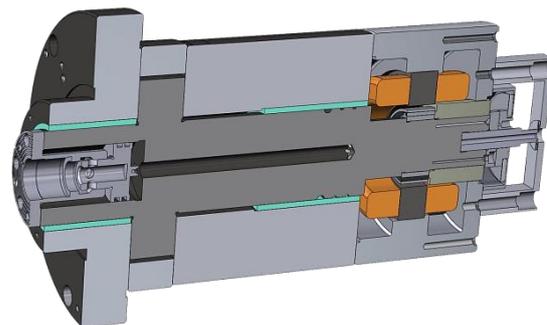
Captured thrust air bearing spindle with integral brushless servo motor and 4096 line count encoder.
